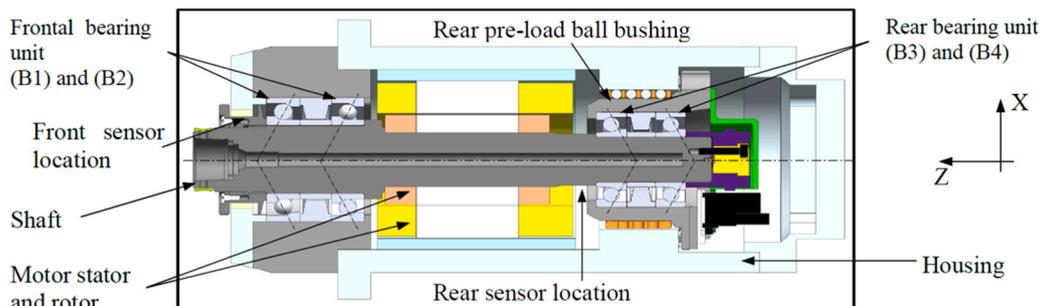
Electro-spindle components (without tool and tool holder) [228].
